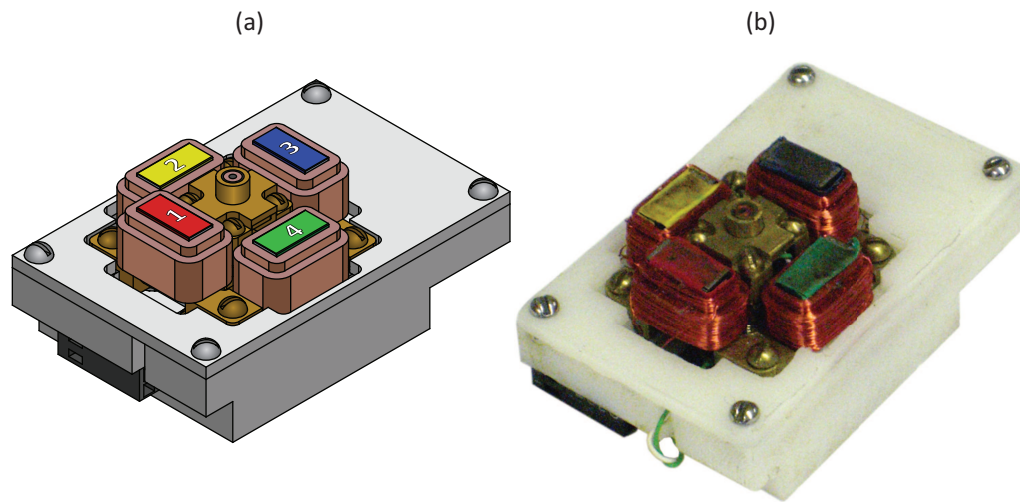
(a) SL4P assembly drawing at 1:1 scale. (b) A photograph of the completed SL4P.
